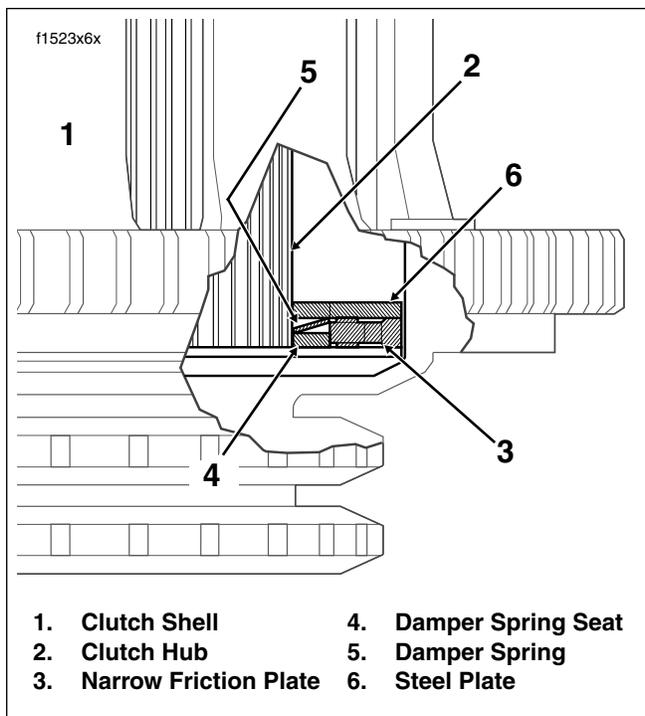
Clutch Pack Stack-Up (Cut-Away View)
